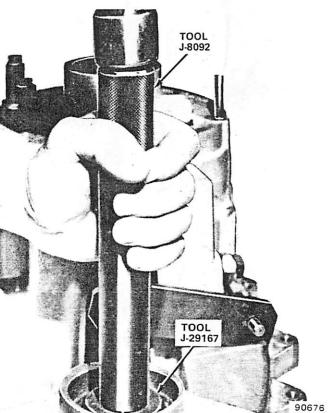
D-28 Front Output Shaft Front Bearing Installation
